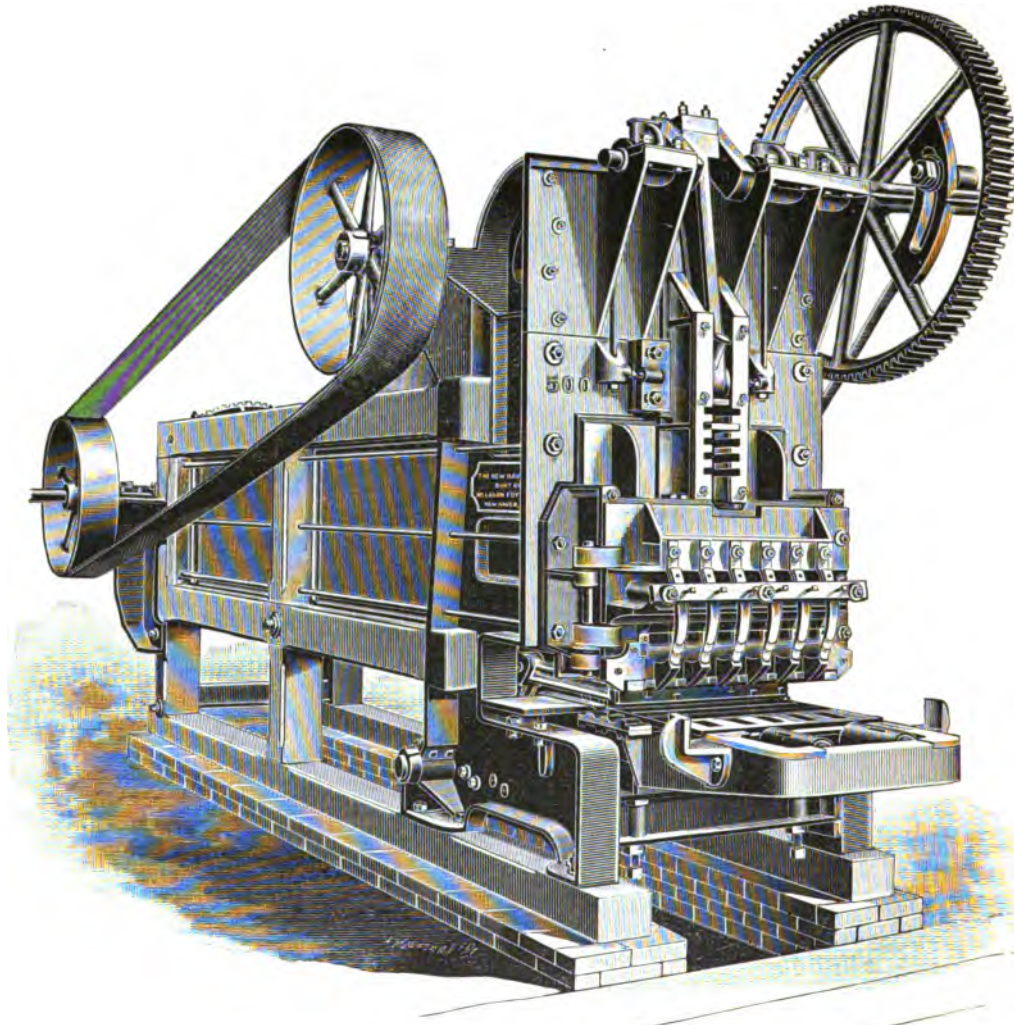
Horizontal Type of Soft Mud Brick Machine.
